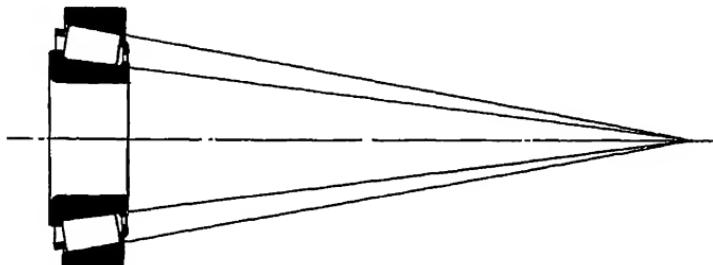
SHOWING THE PRINCIPLE OF THE TIMKEN ROLLER BEARING
